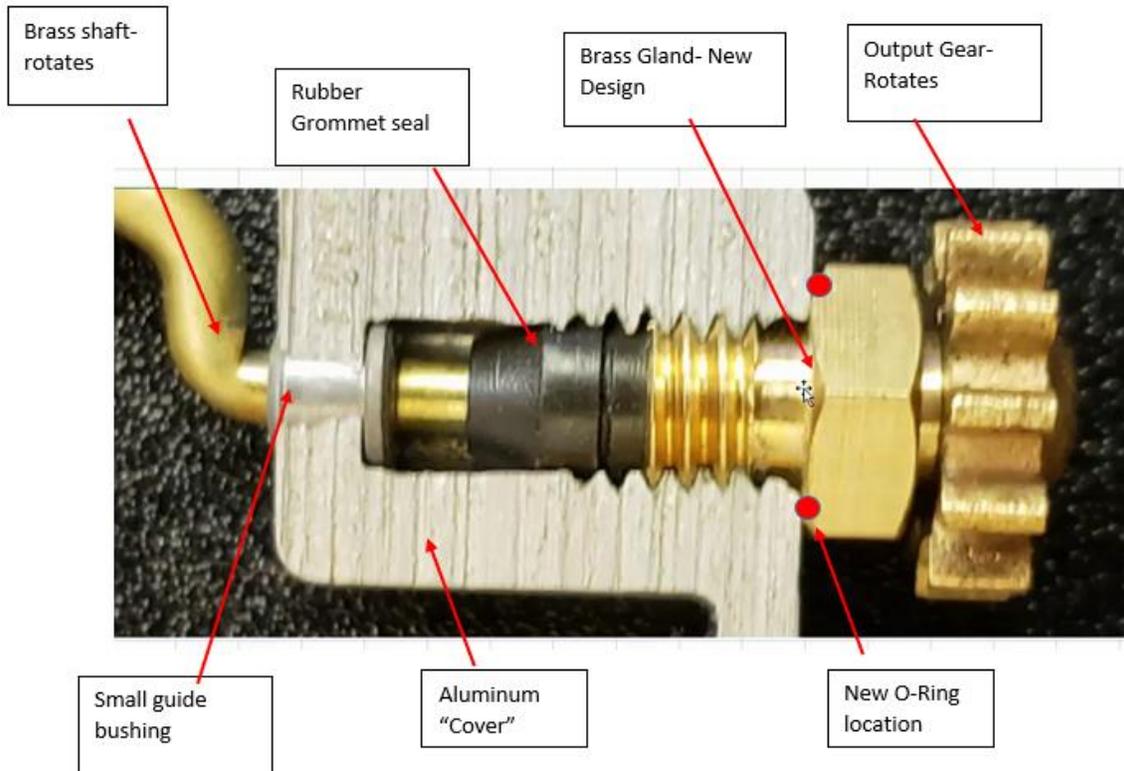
New gland and O-ring cross-section / Section transversale du nouveau presse-étoupe et du joint torique
